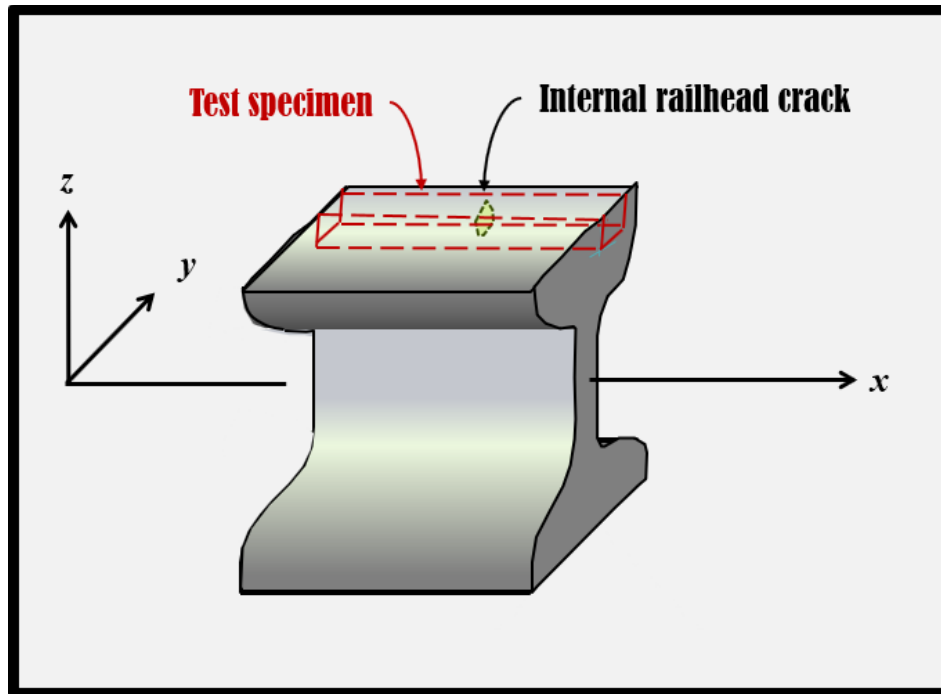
Depiction of Rail with Internal Crack Showing Test Specimen
